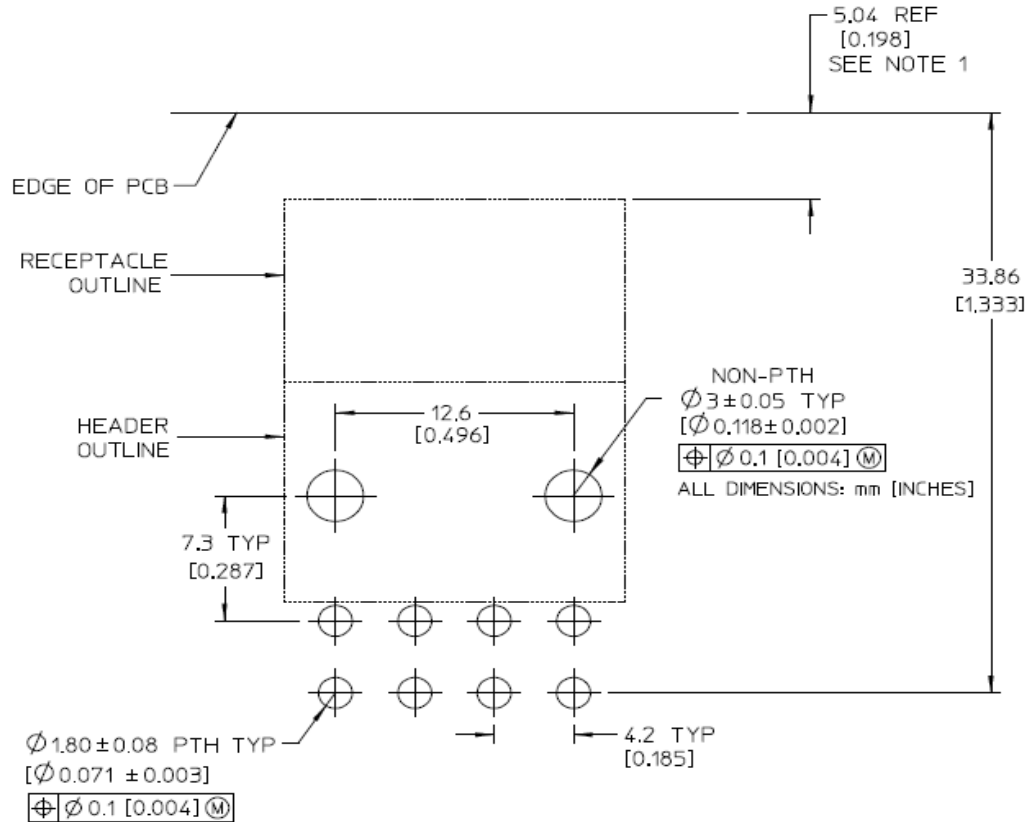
2 x 4 R/A Through-Hole Receptacle Recommended PCB Footprint
